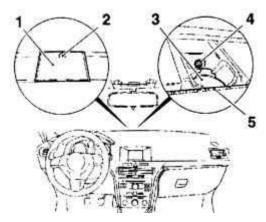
Removing the speaker from the dashboard: 1 - cover the loudspeaker, 2 - sensor sunlight, 3 - speaker 4 - machine screw, 5 - Deflection blowing the windscreen
